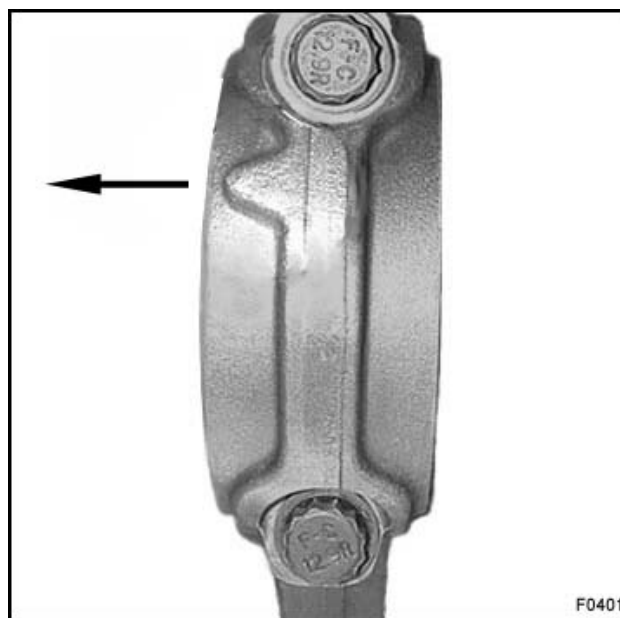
Connecting rod cap with M12 connecting rod cap bolts (protrusion points to front of engine)
